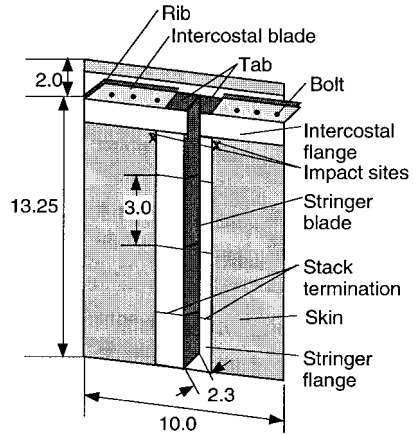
Geometry of a single-stringer panel. Length dimensions are in inches.
